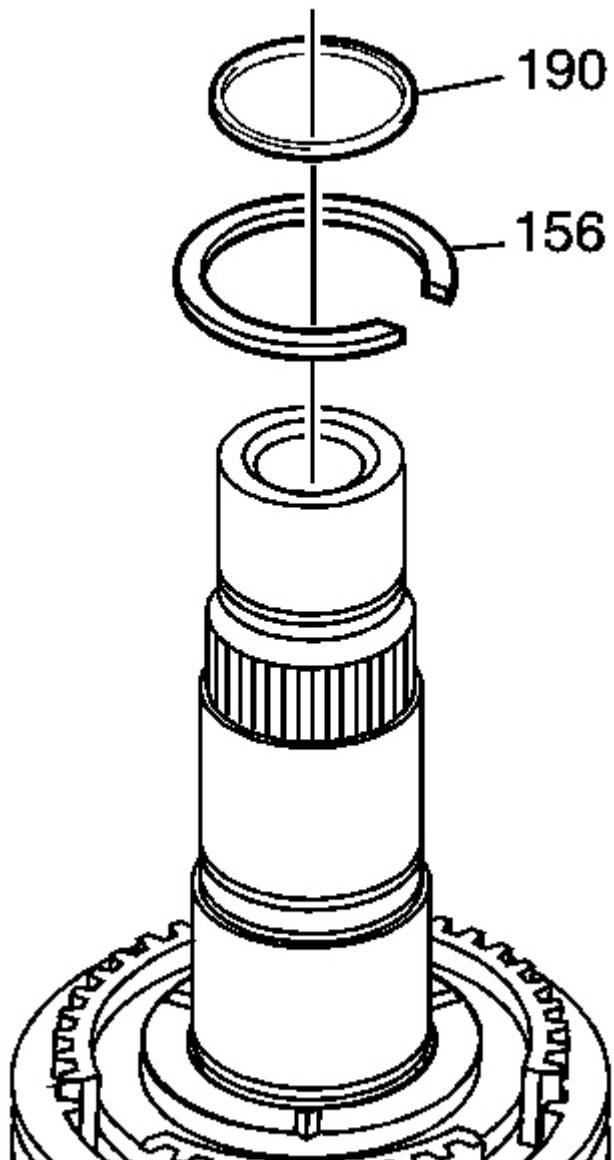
View Of 3rd/4th Gear Spacer & Snap Ring
